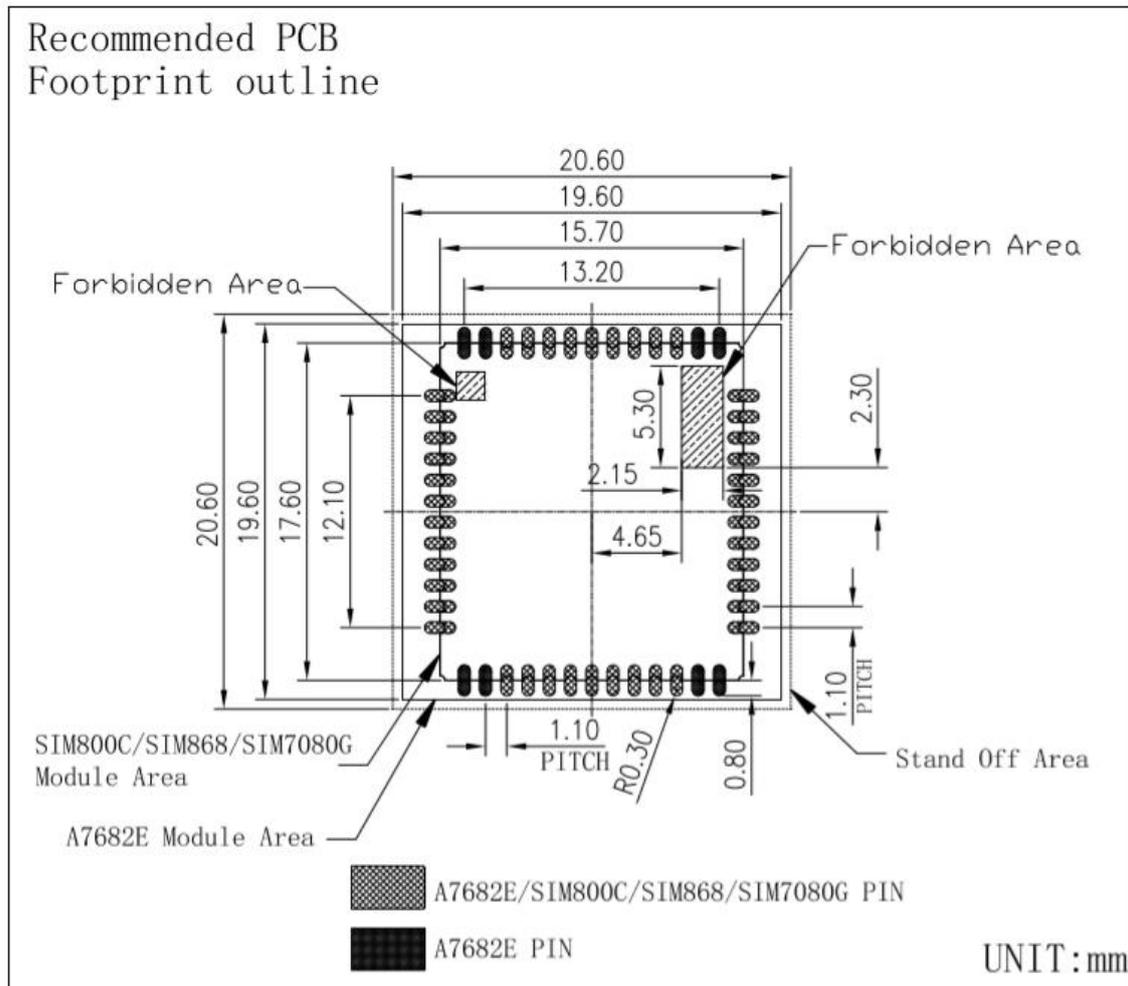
Recommended PCB footprint outline for A7682E/SIM800C/SIM868/SIM7080G (Unit: mm)
